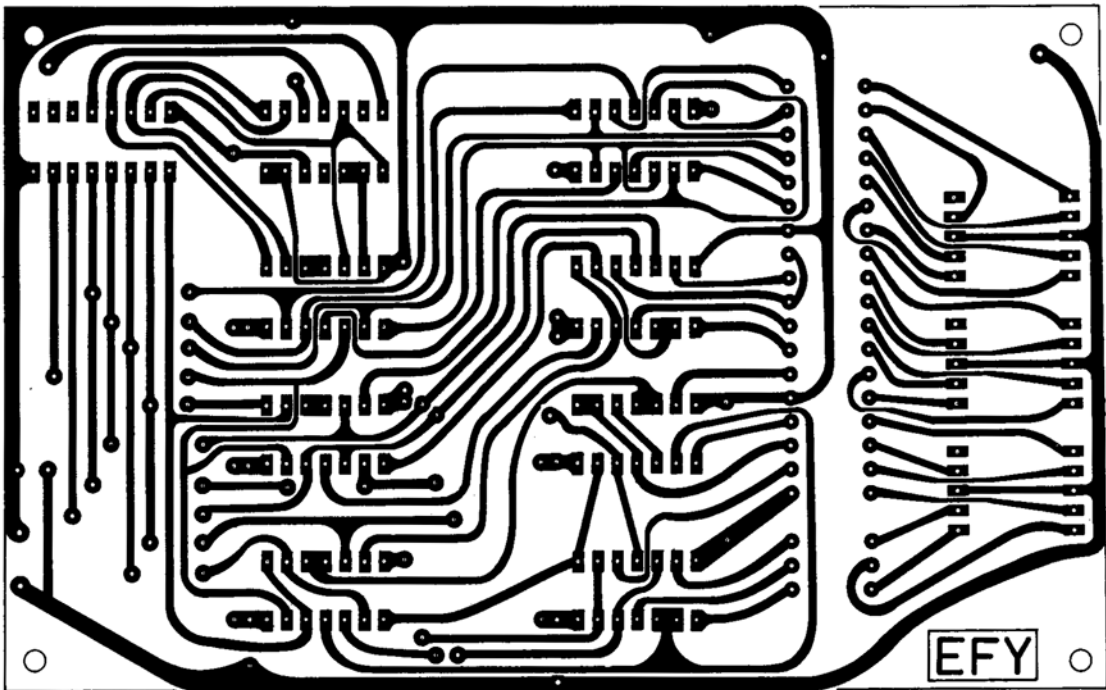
Actual size PCB layout of alphabetical day indicator.
